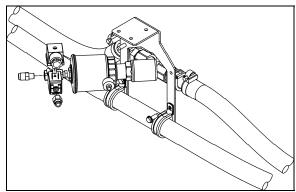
TYPE 2 (FROM VIN F-7015) DRIVER'S UNIT HOT WATER PNEUMATIC VALVE ASSEMBLY
